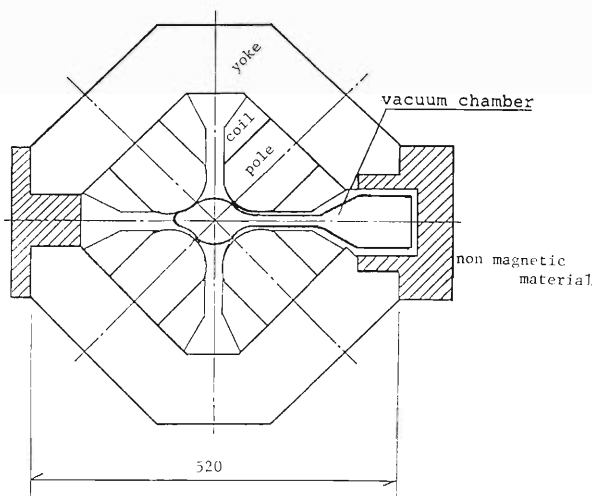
Cross sectional view of the quadrupole magnet in which a vacuum chamber with an antechamber is installed.
